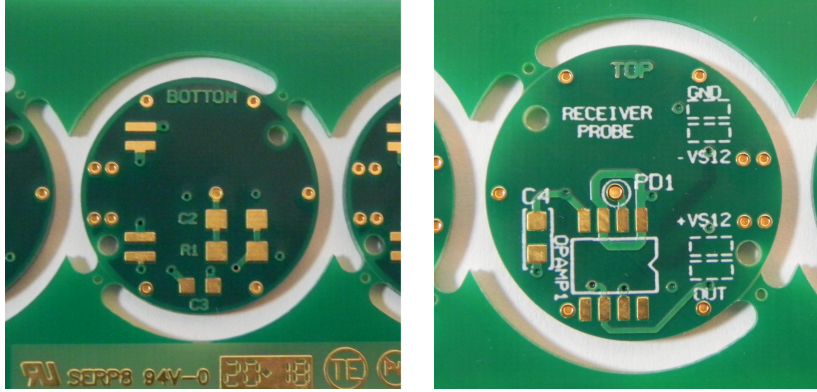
Printed circuit boards for the photodiode receiver probe. Left: bottom view, right: top view.
